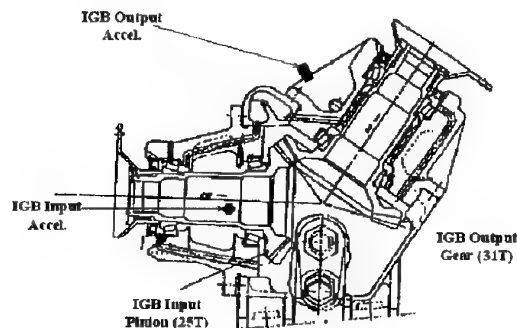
SH-60 Intermediate Gearbox Cutaway.
